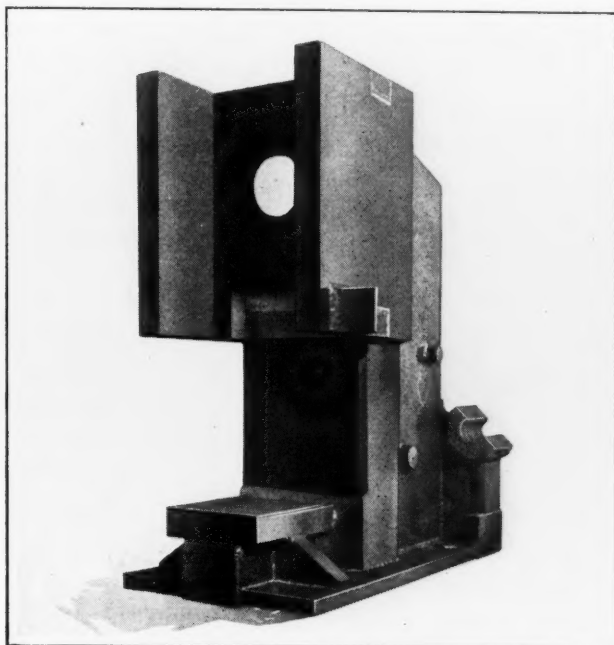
Arc-welded Housing Weighing 31,500 Pounds for Machine Shown in Fig. 7
